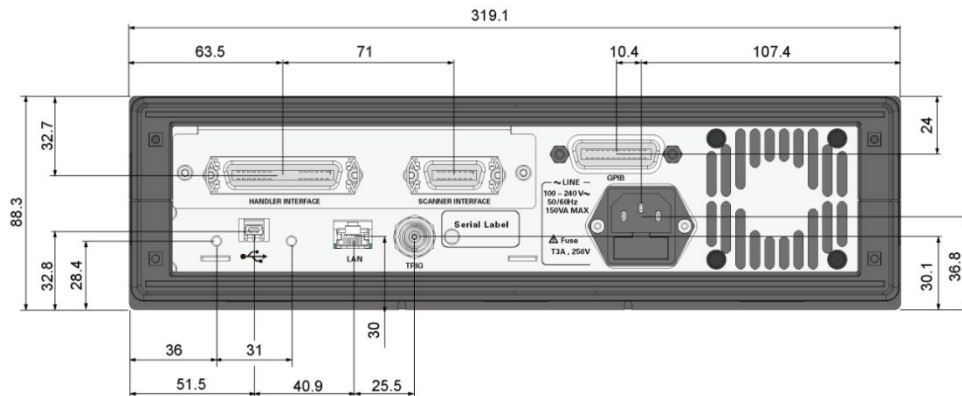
Dimensions (rear view, without handle and bumper, in millimeters, nominal)
